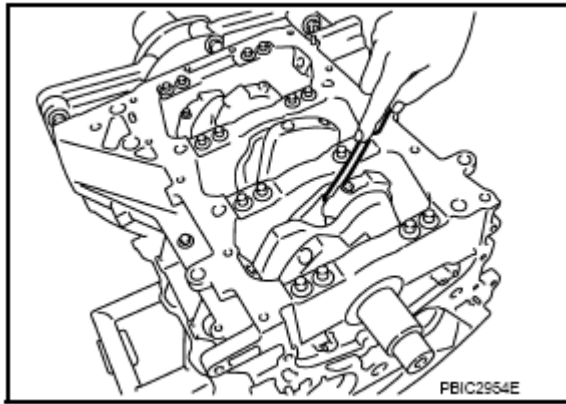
Measuring Connecting Rod Side Clearance Using Feeler Gauge
